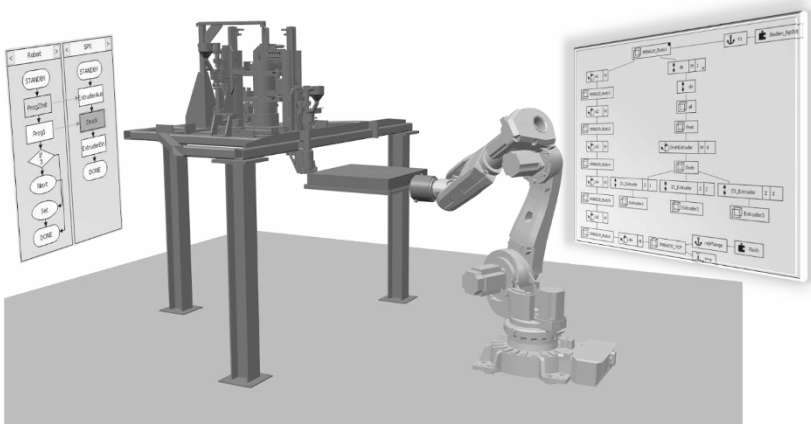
Additive manufacturing of large components using universal industrial robotics and simulation tools to assist development (Fraunhofer IFF)
